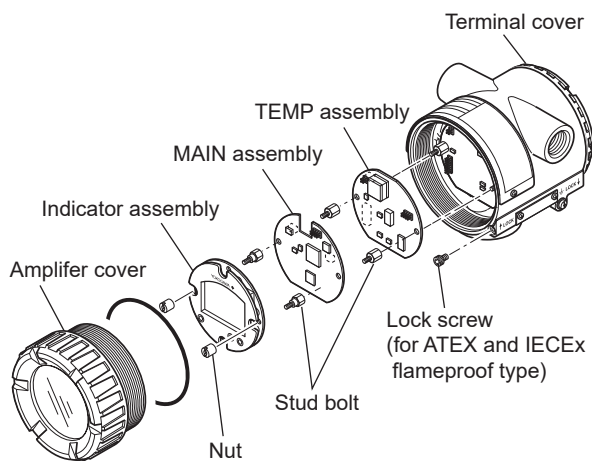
Mounting and Removal of Integral Indicator Assembly
